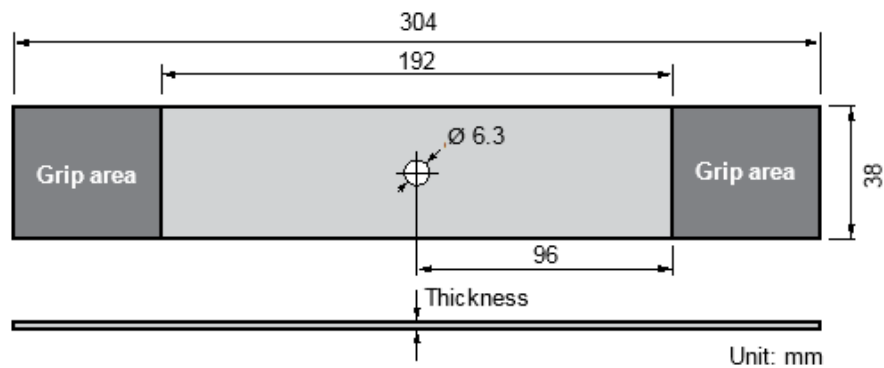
Dimensions of the open hole tension (OHT) specimen [72].
